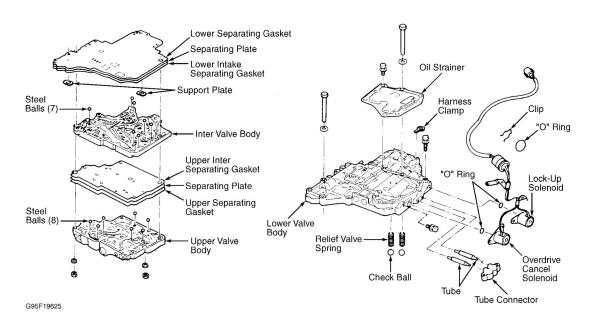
Exploded View Of Control Valve Assembly Courtesy of NISSAN MOTOR CO., U.S.A.
